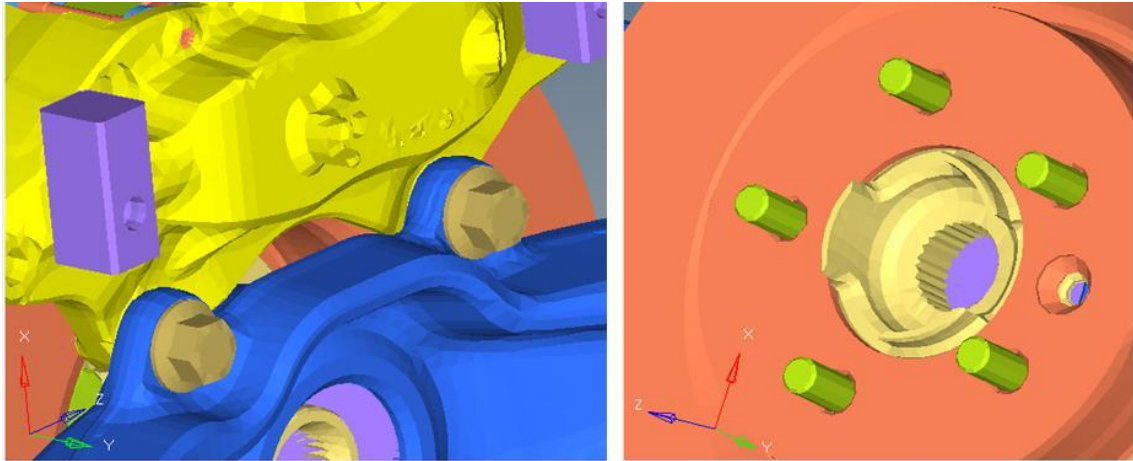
, Solid bolts – 1% contact damping (Left: caliper-knuckle - Right: disc-hub)
